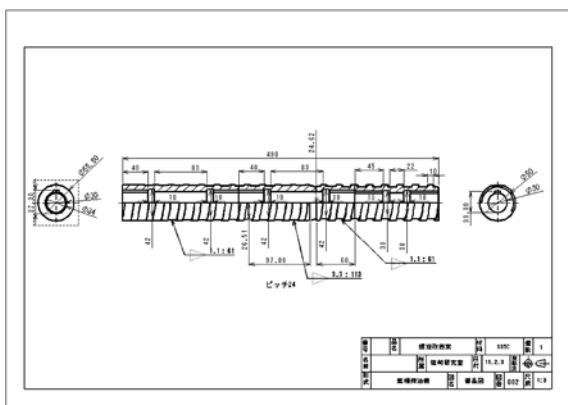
Design sheet of a rapeseed oil squeezing spiral shaft used in rapeseed oil squeezing machine
